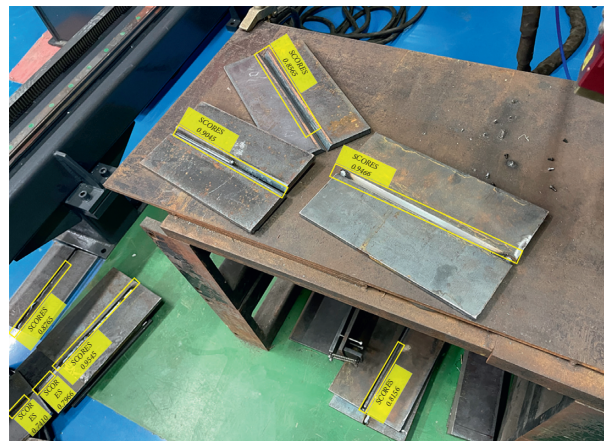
Multiple weld plate workpiece identification effect.
